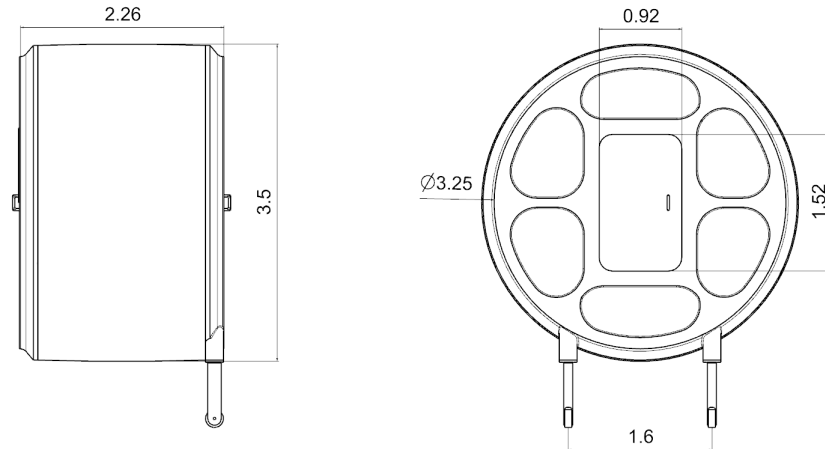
Dimensioned Drawing of Surface Airlock (meters)
